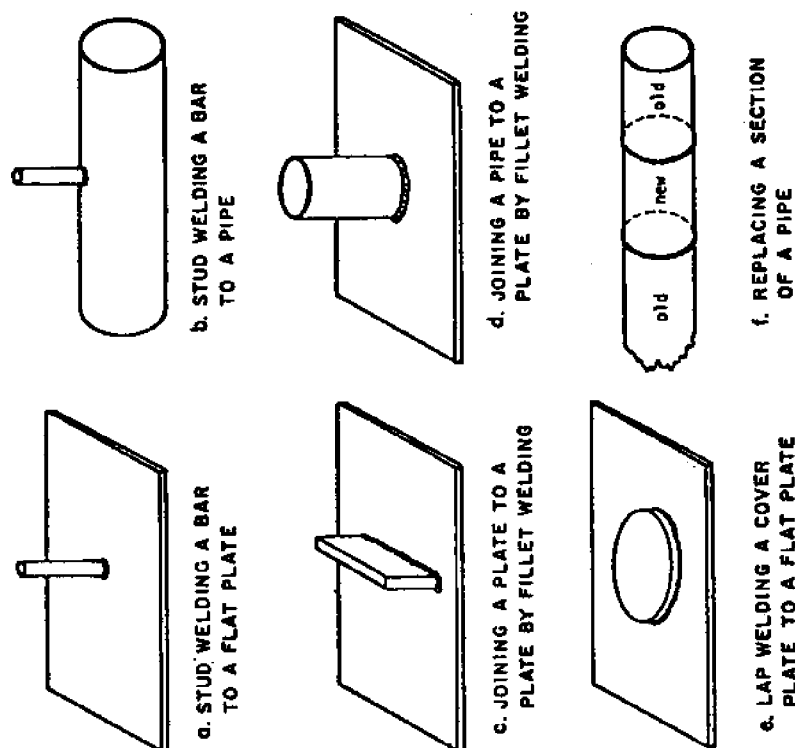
Several basic types of joints investigated for welding by instamatic systems
